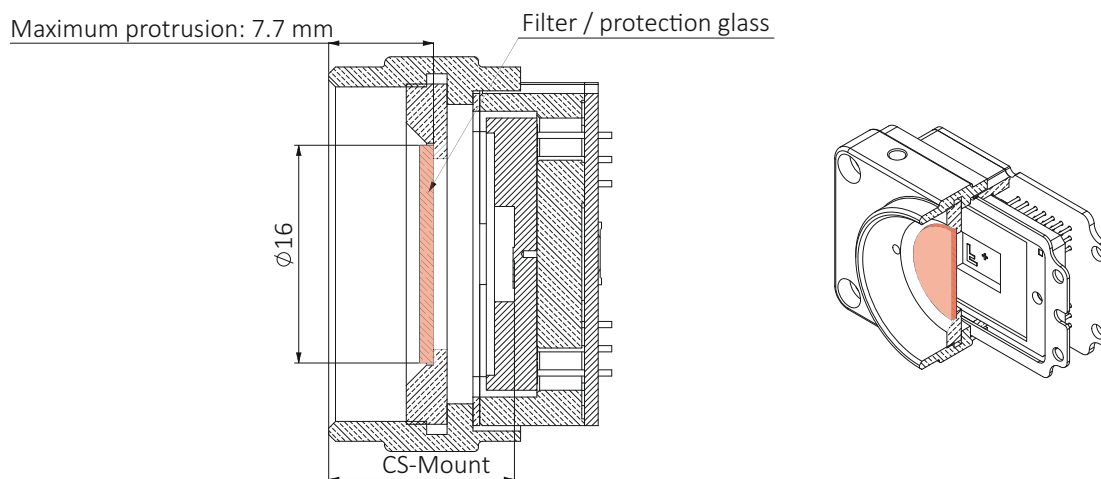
Manta type B CS-Mount dimensions (16 mm filter)
